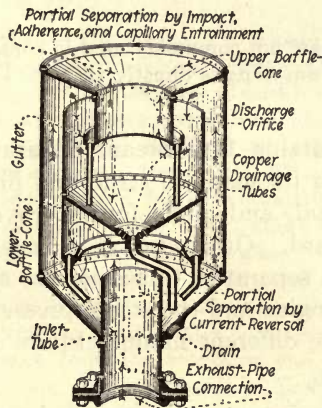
“Wright” Baffle-Plate Exhaust-Head.
